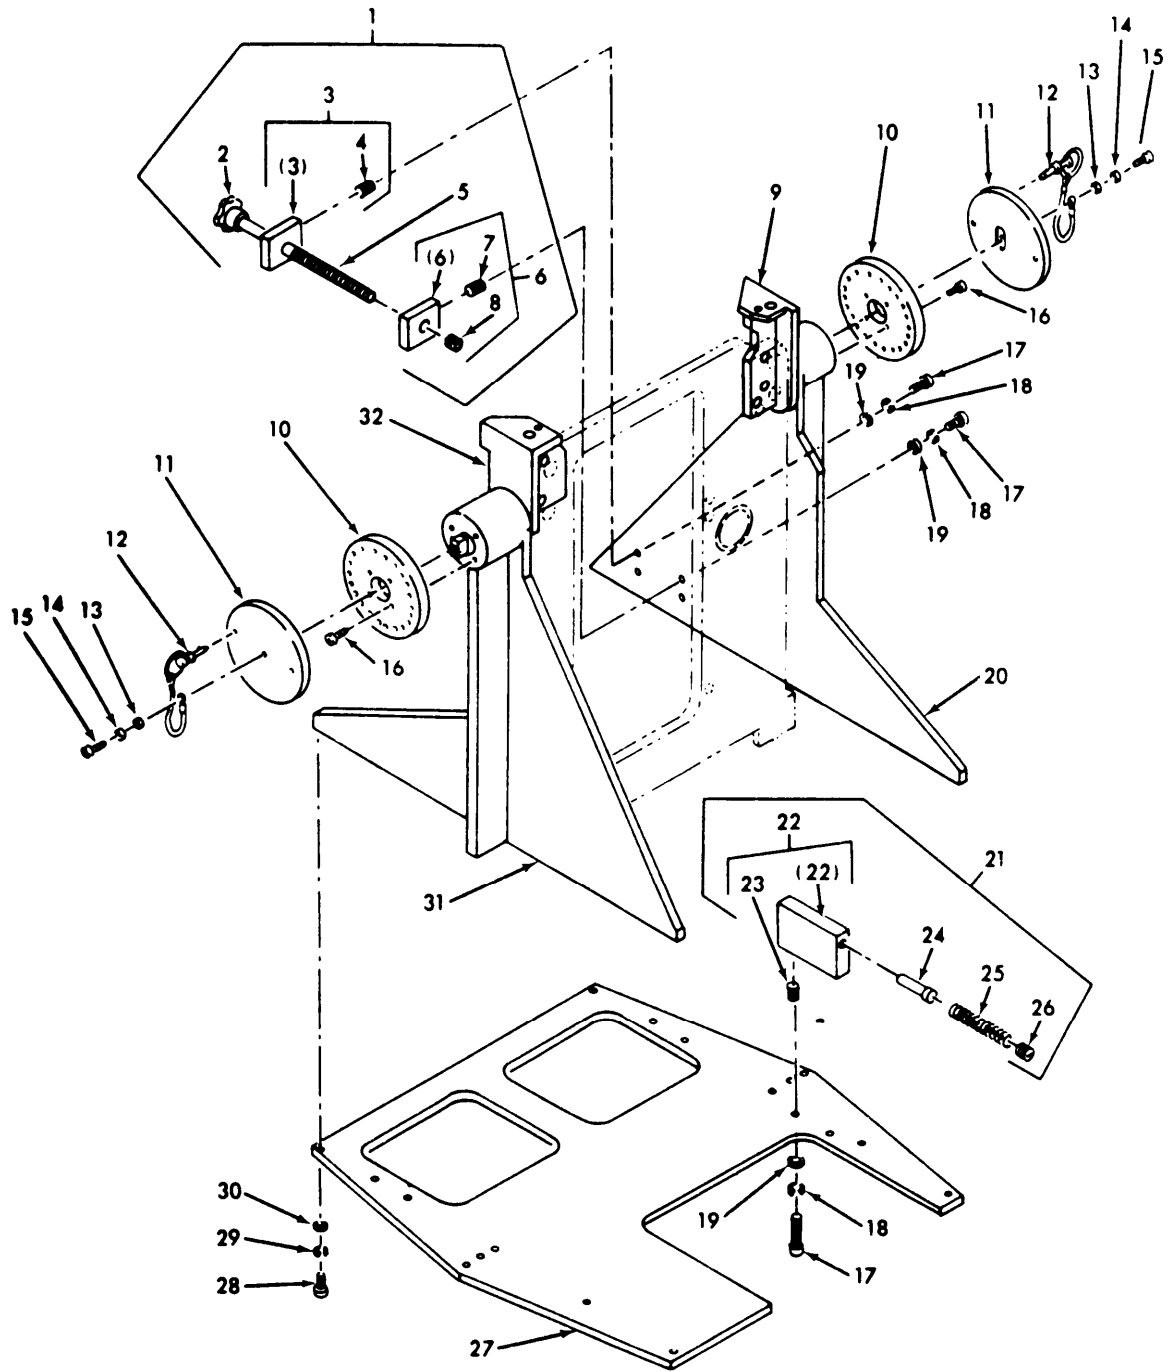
HOLDING FIXTURE ASSEMBLY COMPONENT PARTS
